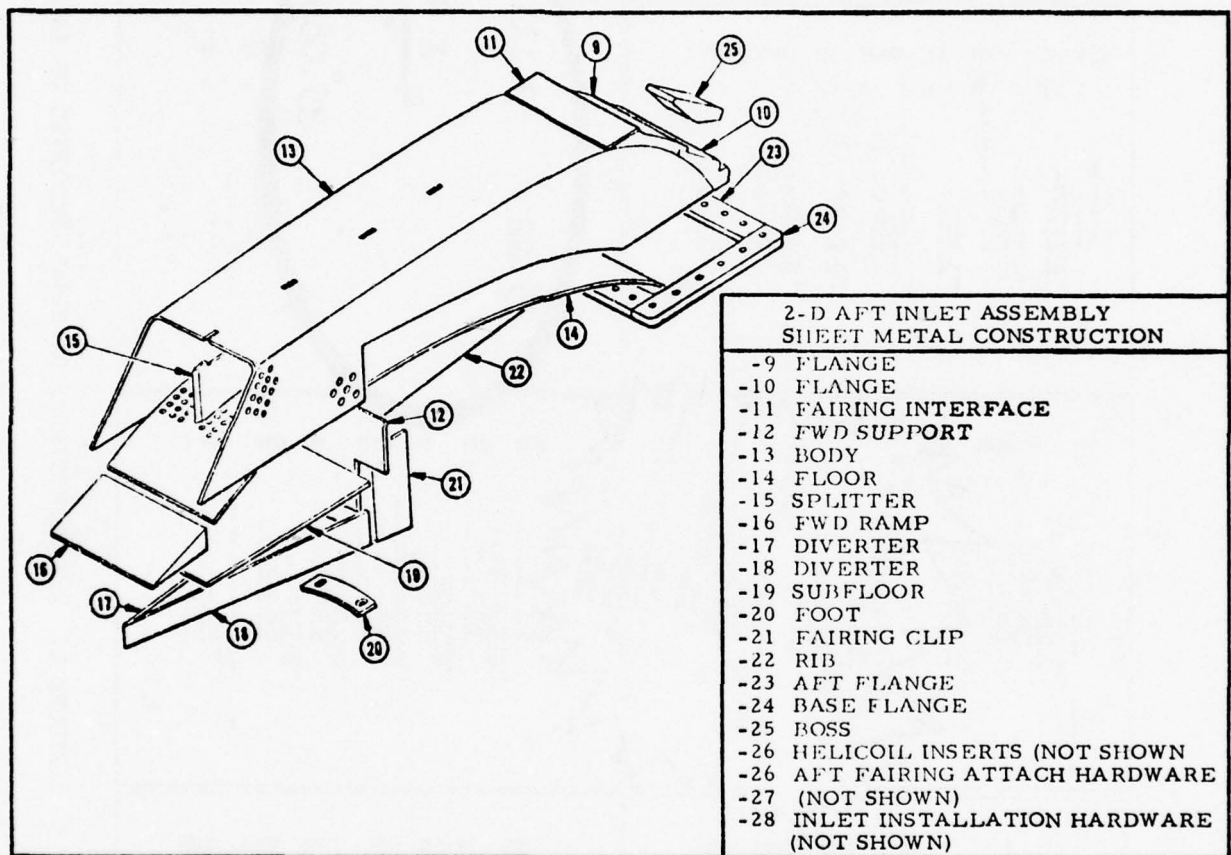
2-D AFT INLET ASSEMBLY - SHEET METAL CONSTRUCTION
